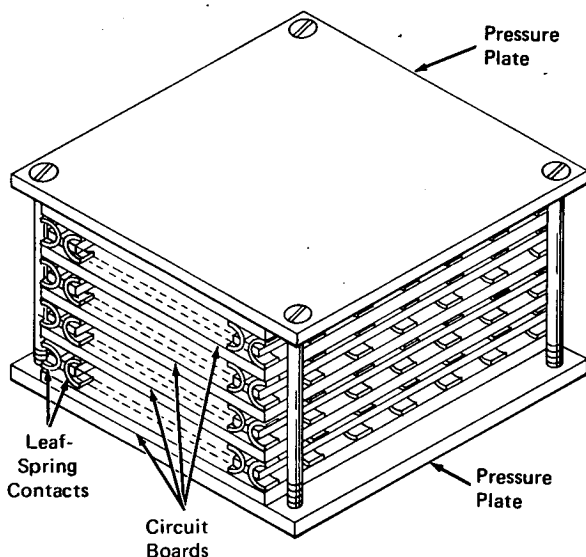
Electronic Packaging Using Leaf-Spring Contacts
